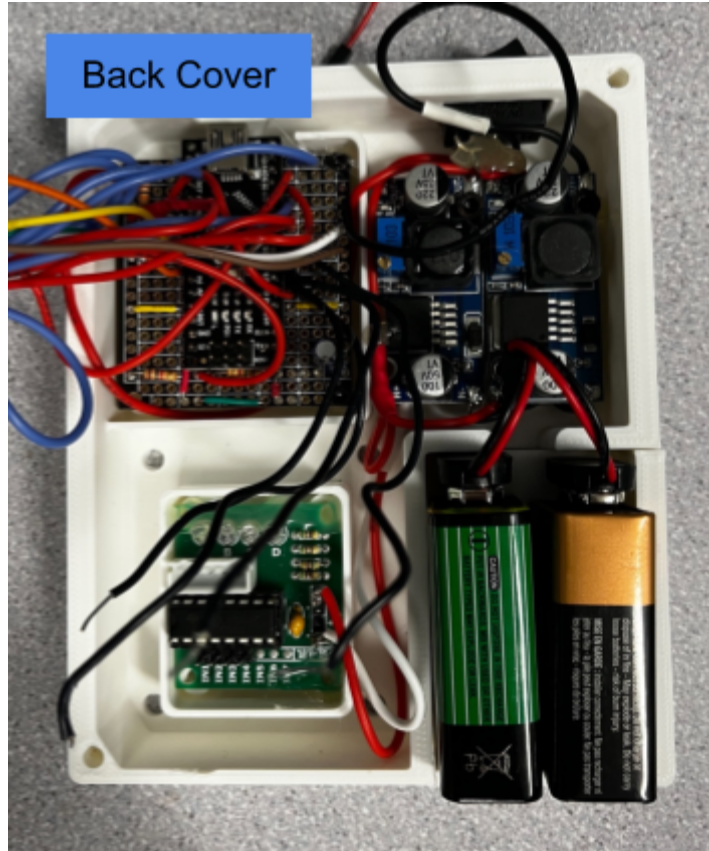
Manufactured back cover consisting the board, motor driver board, and the buck converters
